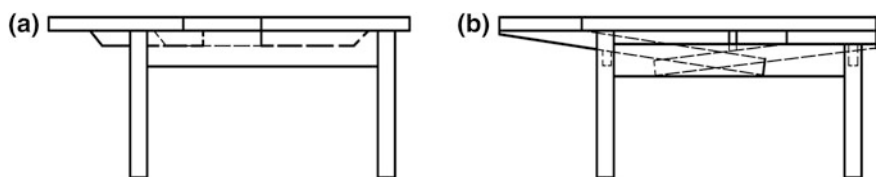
Tables with sideboards supported on additional supports: a two-piece board, b auxiliary worktops
